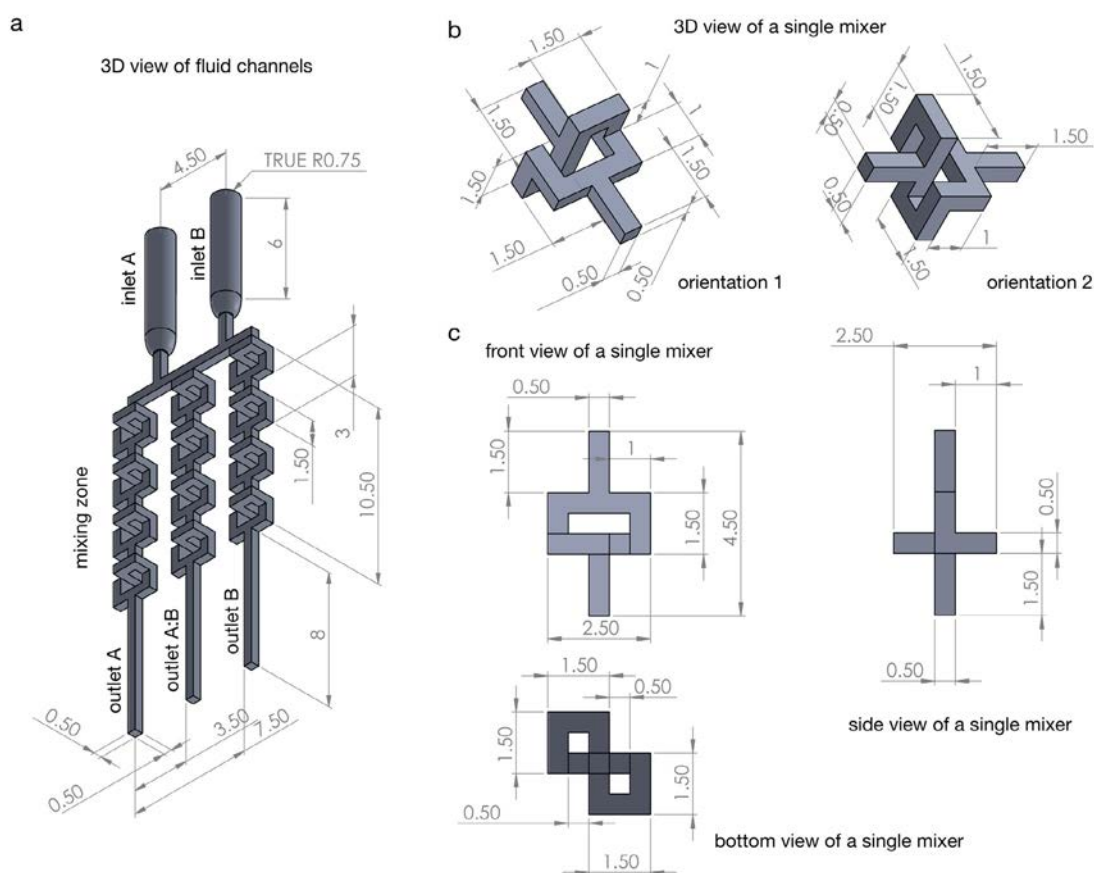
(a) 3D CAD drawing of fluid channels inside the microfluidic device showing the geometrical dimensions for inlets, mixing zone and outlet sections. (b) Magnified 3D views of a single mixer unit from two different orientations to give detailed information about geometry. (c) Technical drawing of a single mixer unit showing front, bottom and side views with geometrical dimensions. All dimensions are in millimeter.
